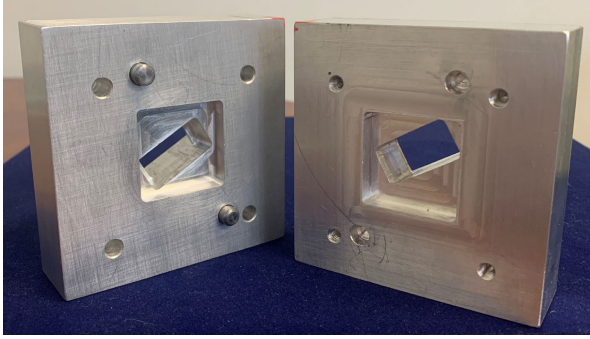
Manufactured prototype composed of two CNC machined aluminum blocks (WR-112 mounting flanges are realized on the other side of each block).
